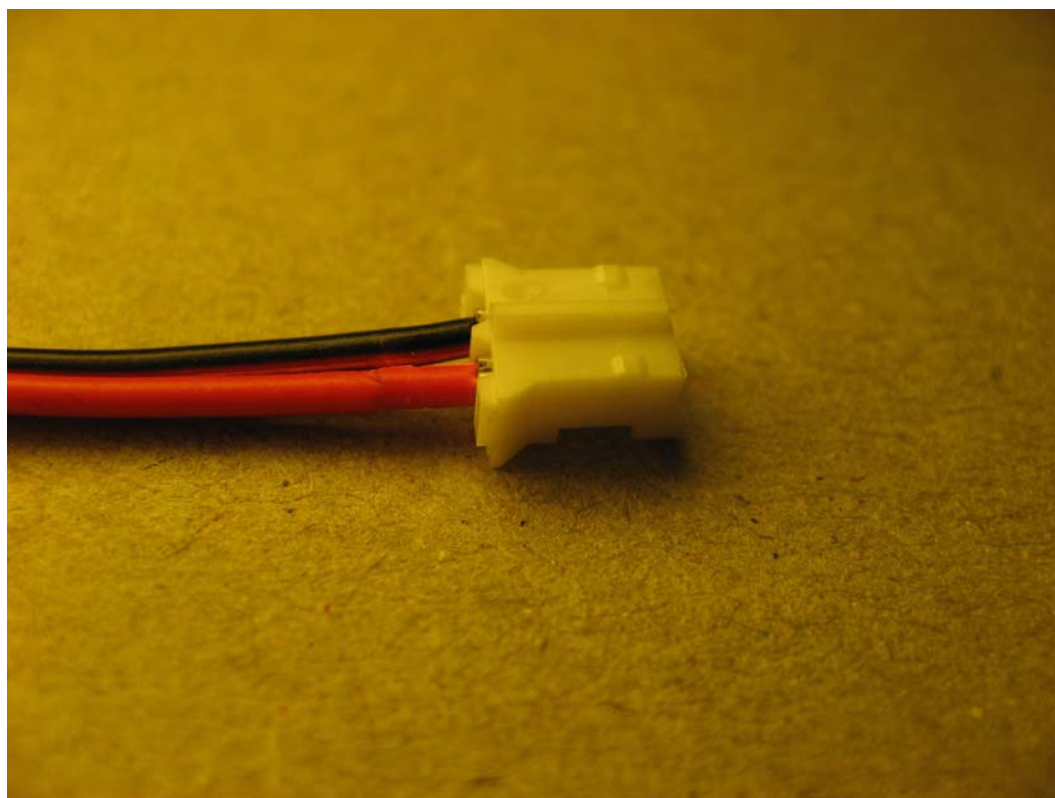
Polarity should be as shown in the picture. (The connector consists of 2 pcs. E52300611 and 1 pcs. E52300711)
